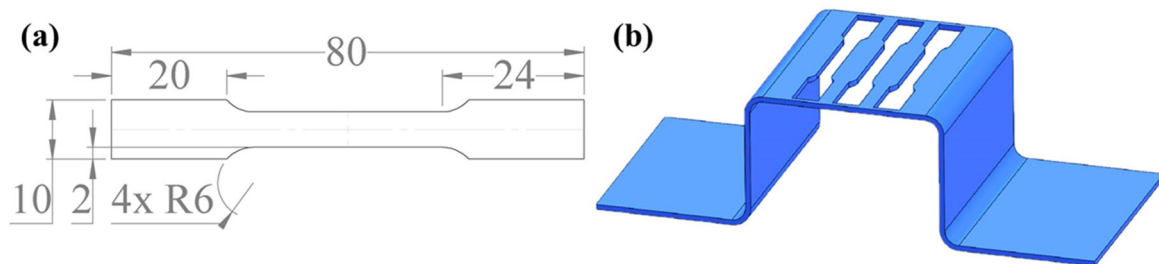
Specimen preparation for post-PBC strength evaluation (a) design (dimensions are in mm) and (b) location of tensile test specimens from formed u-shaped parts.
